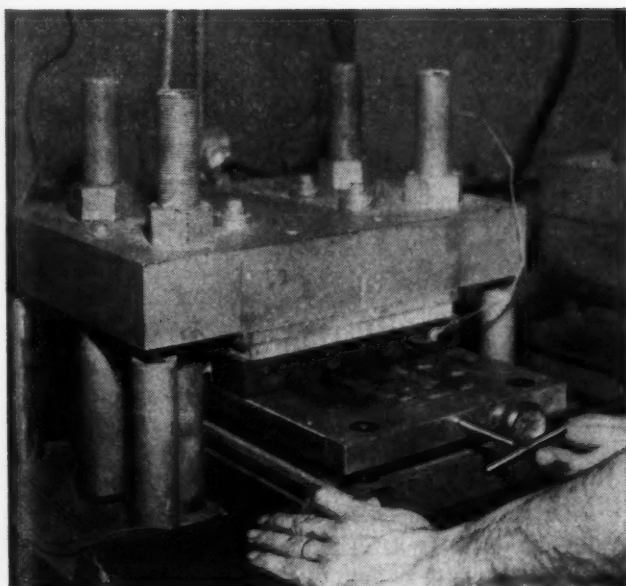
HYDRAULIC PRESS with heated platen is used to flush circuits. Second cold press for cooling flushed circuit while still under pressure may be used to speed production.
